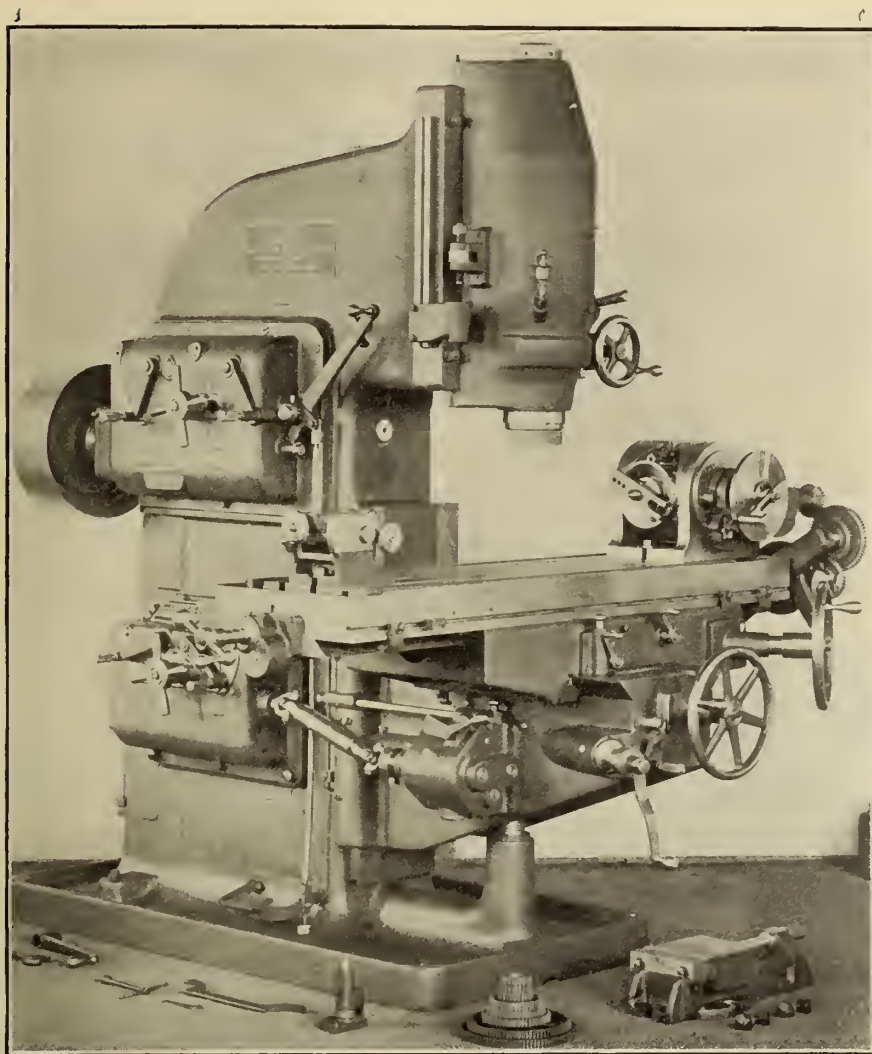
Vertical Machine Arranged for Cutting Spirals.
